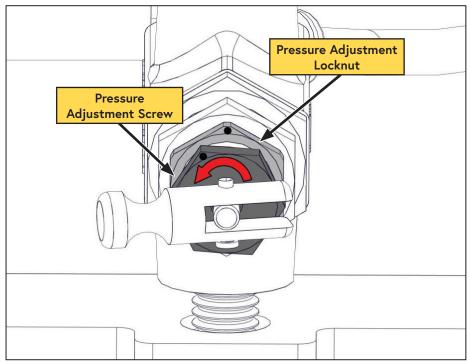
Adjusting the Unloader Valve (engine base plate removed for clarity)
